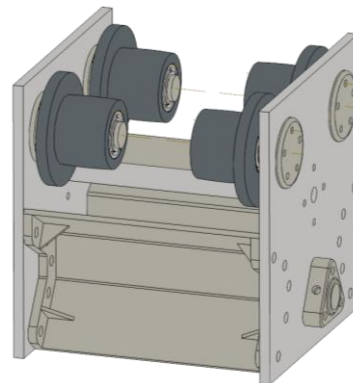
/Trolley Assembly, Non-drive side/
